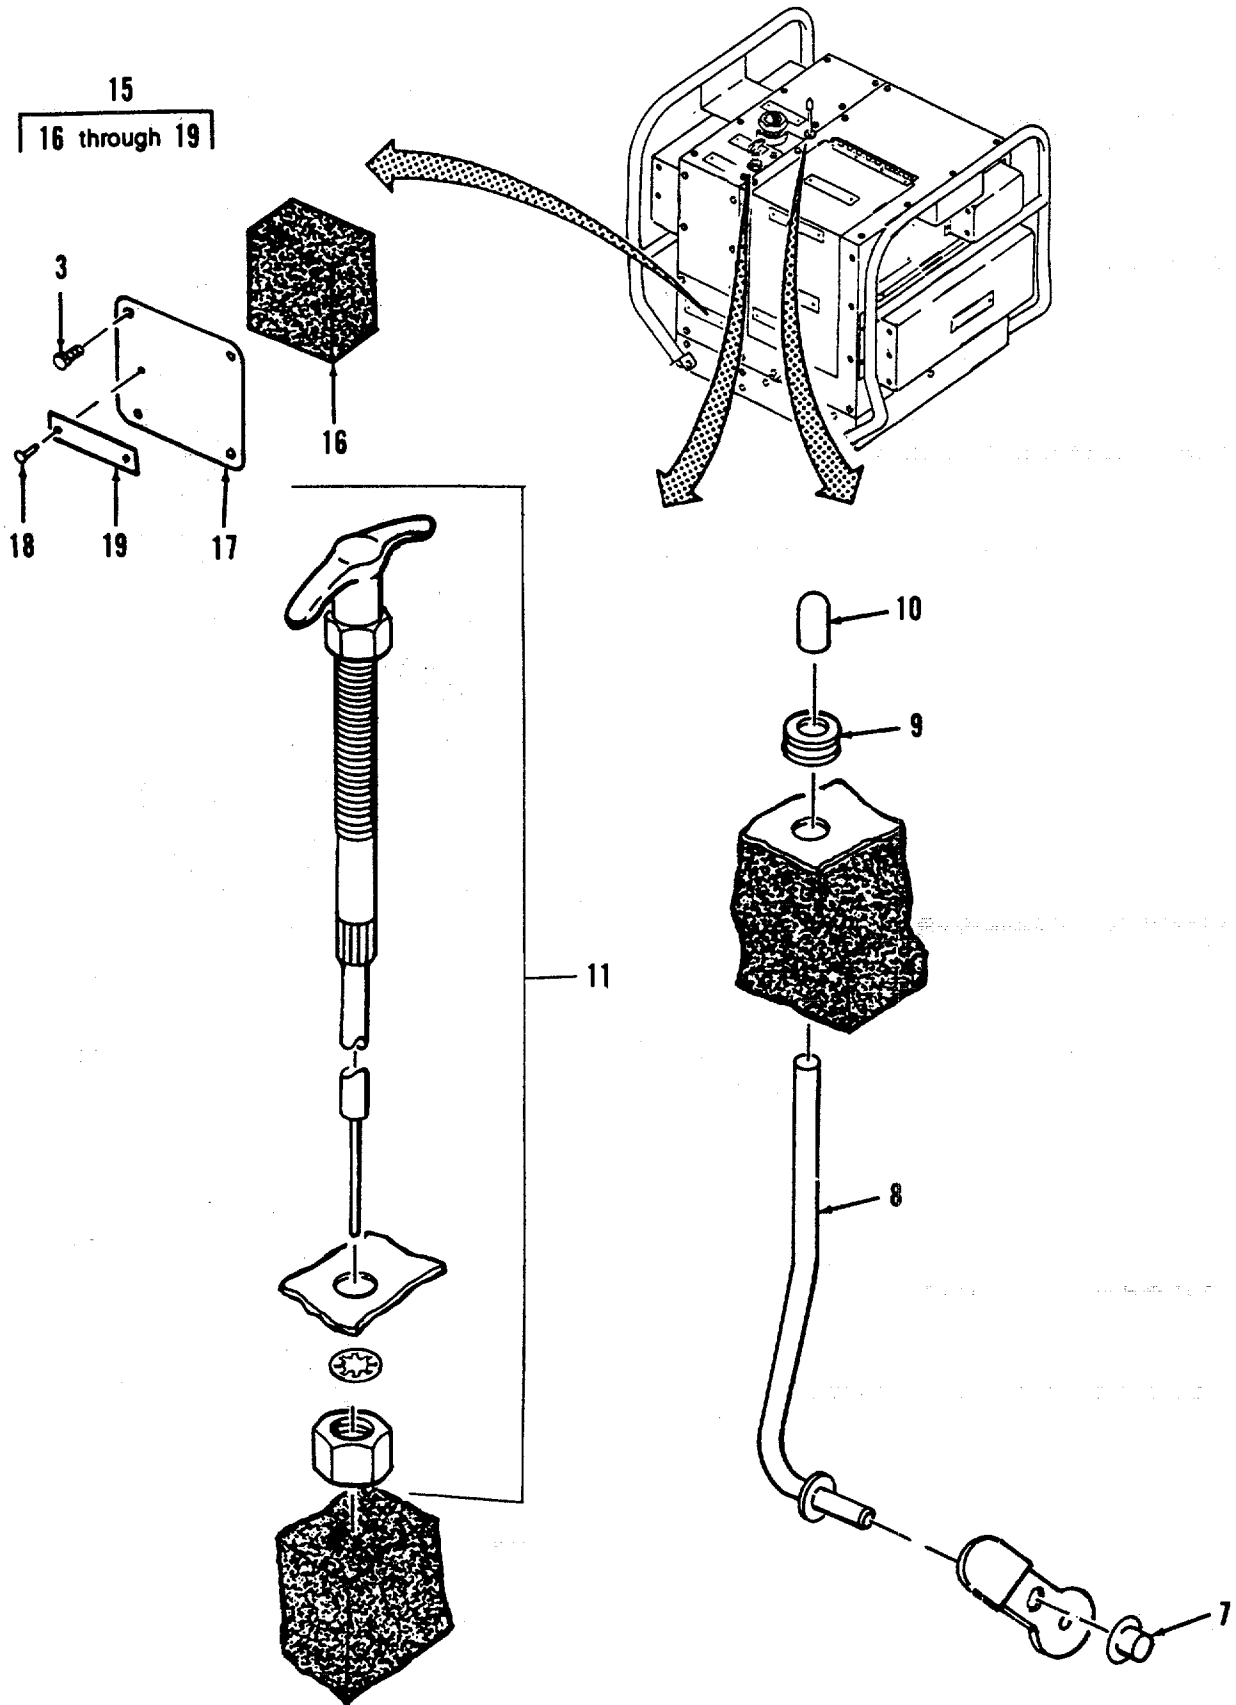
Enclosure Assembly (Sheet 2 of 4)
